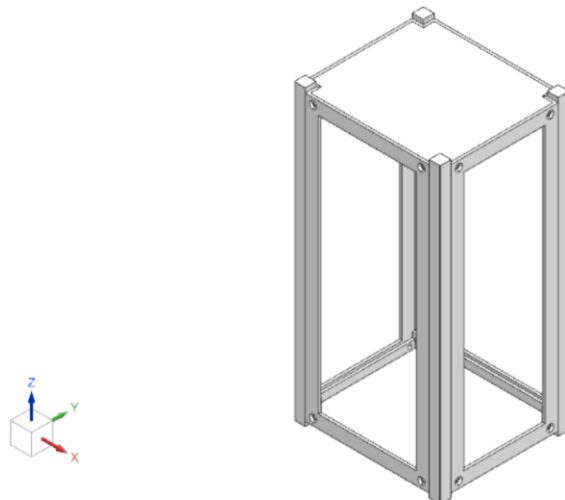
Isometric View of Assembled Chassis with Coordinate System.
